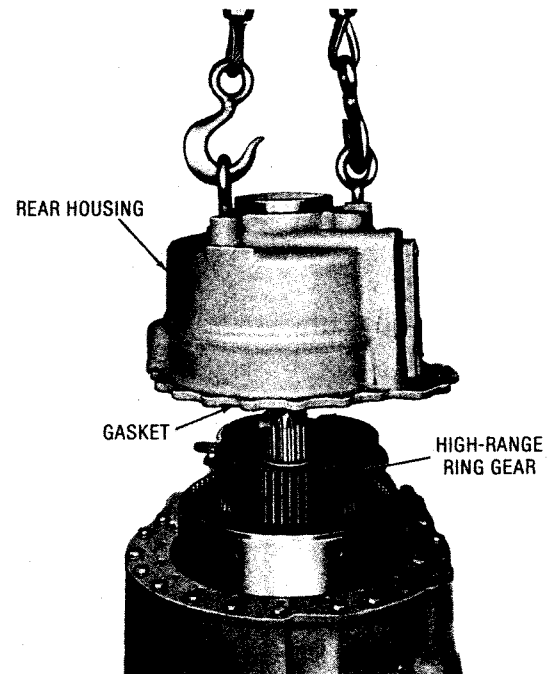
Installing transmission rear housing assembly (TRT-1)
